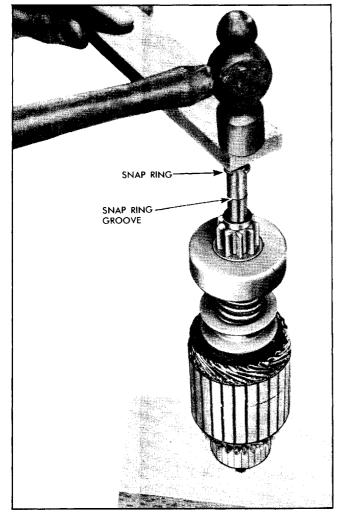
Forcing Snap Ring Onto Armature Shaft
